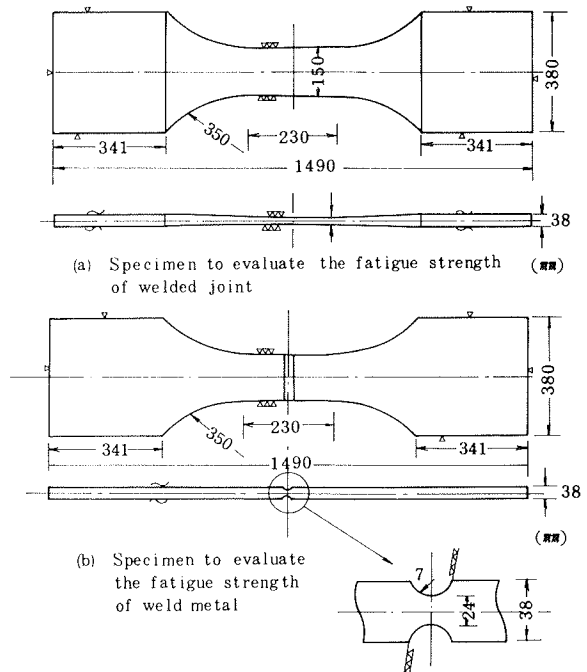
Specimens for test of fatigue strength of welded joint.
